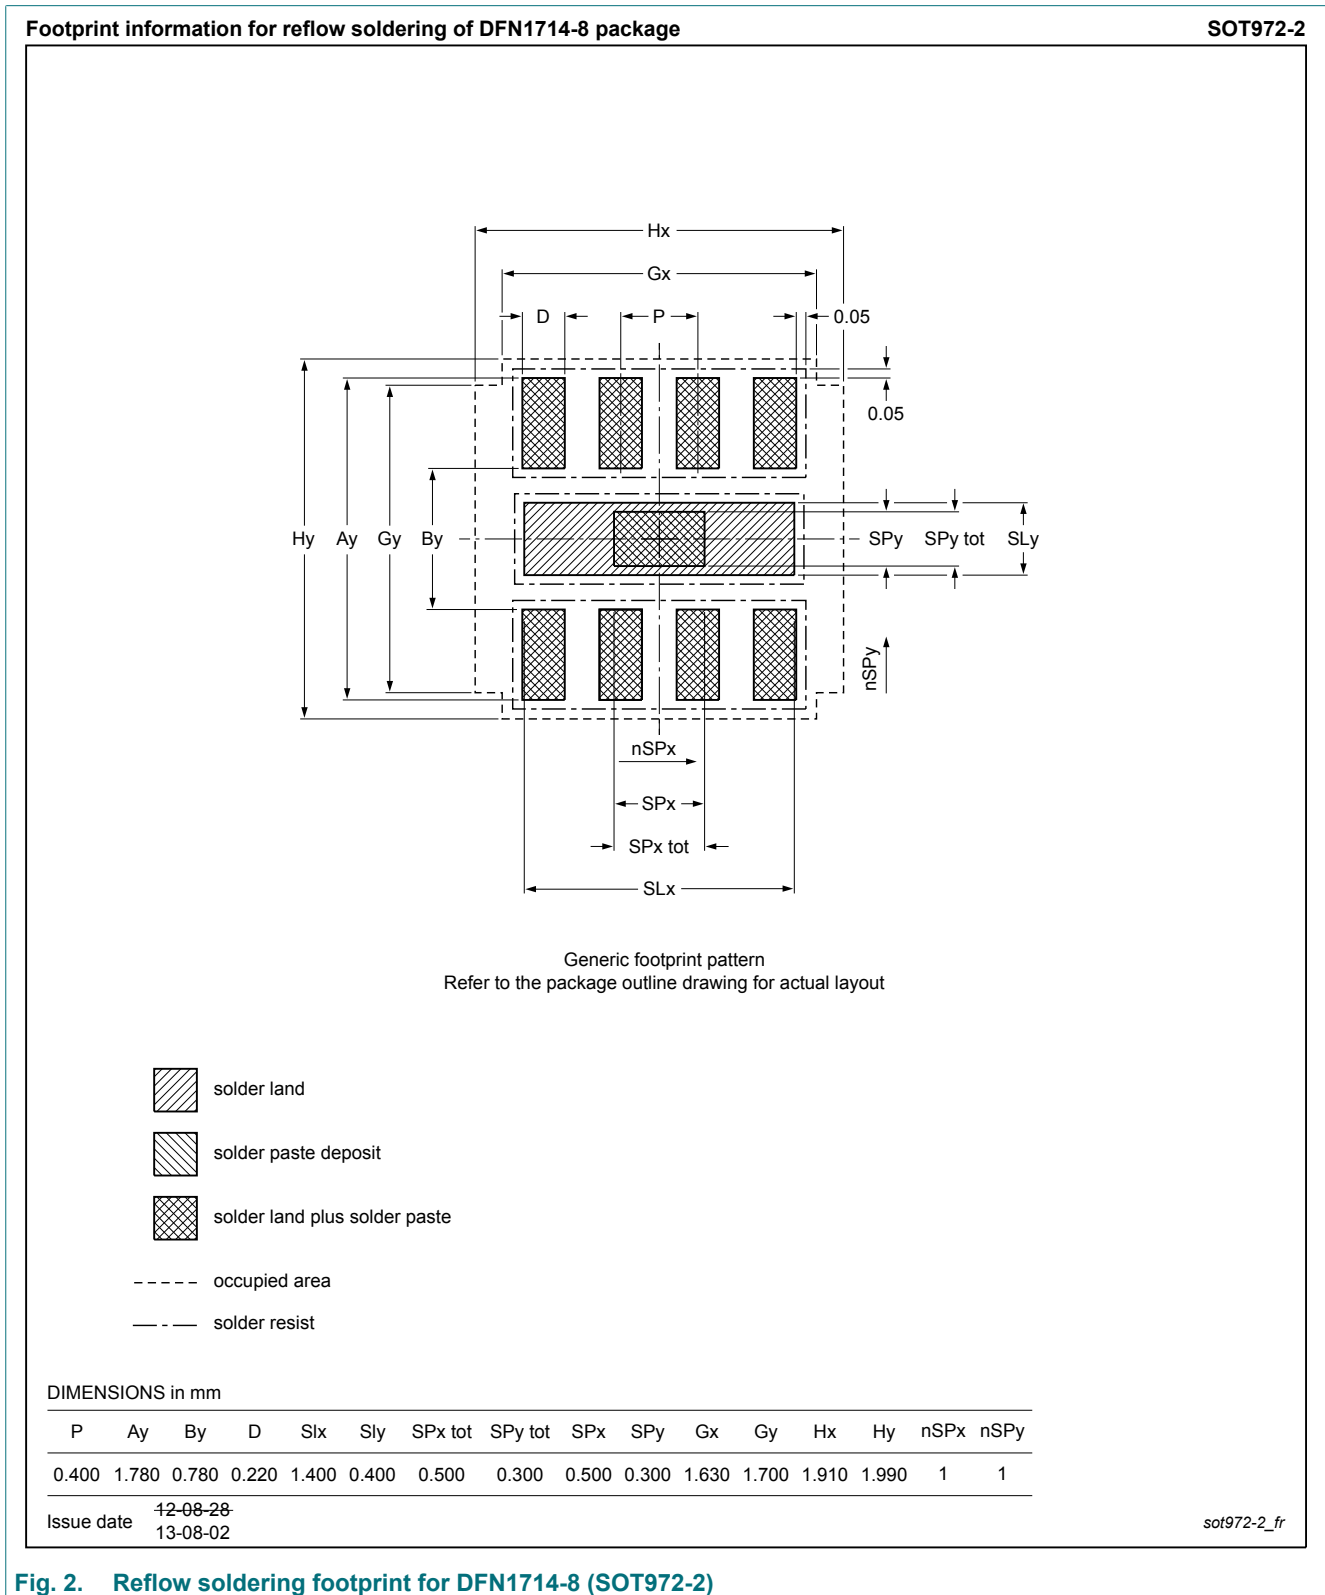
Reflow soldering footprint for DFN1714-8 (SOT972-2)
